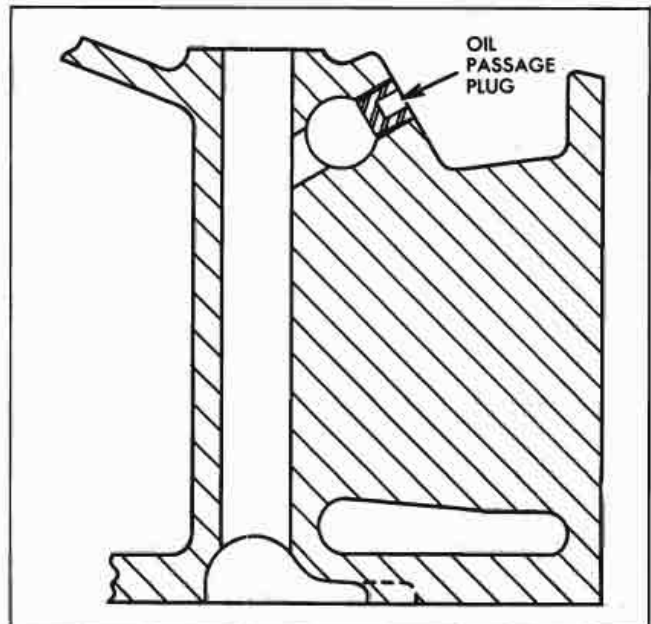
Cylinder Head Small Oil Passage Plug
